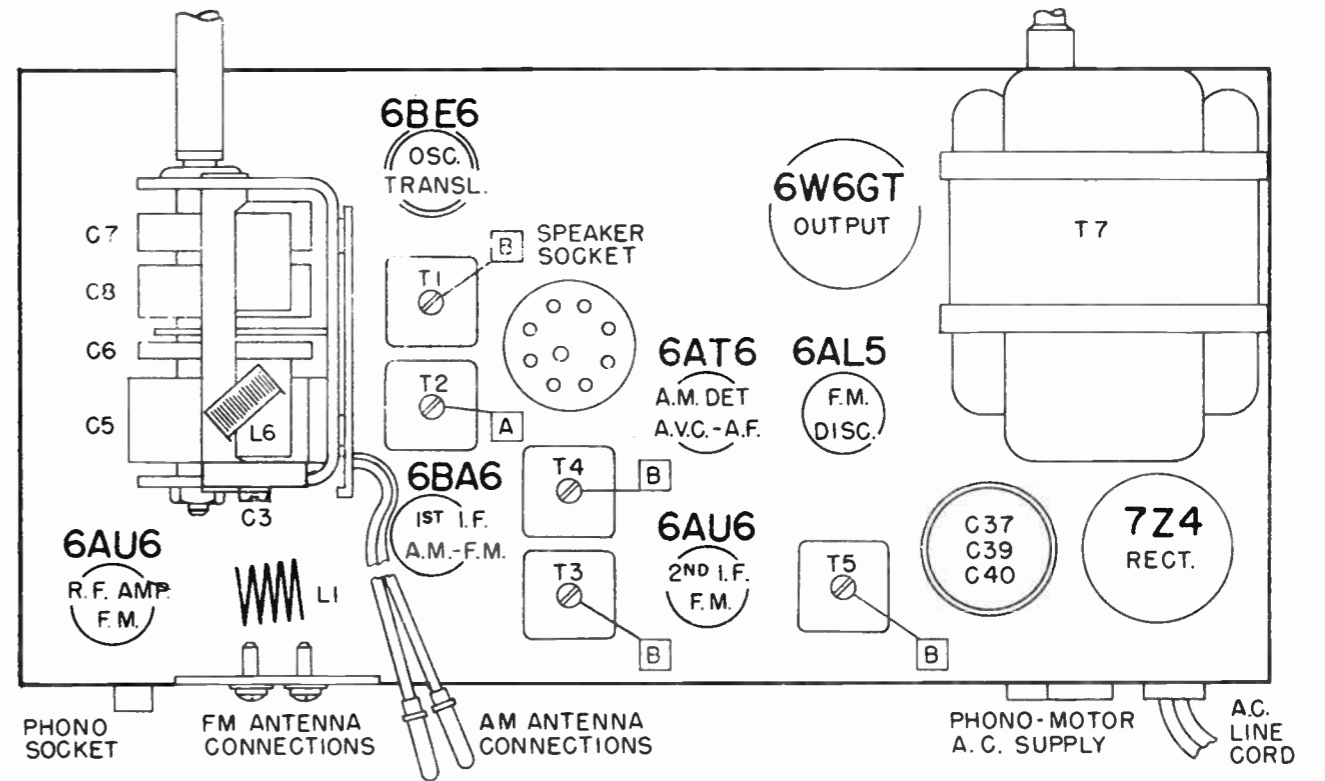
RADIO CHASSIS LAYOUT - TOP VIEW
